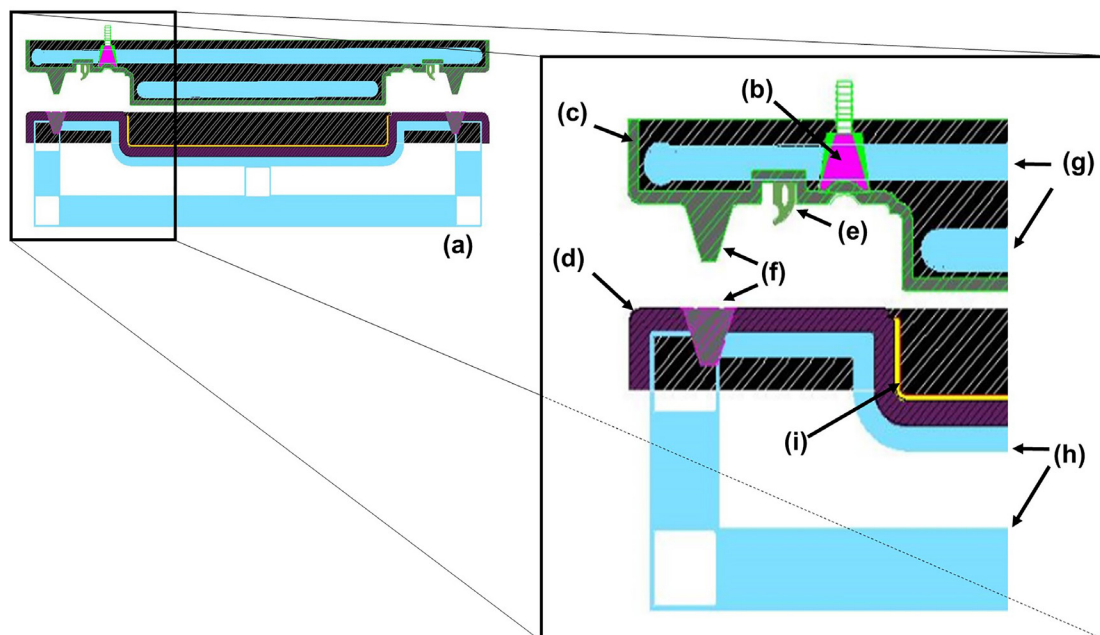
(a) schematic cross section view of RSVAM mold dies, (b) vacuum duct, (c) upper mold die, (d) lower mold die, (e) rubber gasket, (f) alignment dowels, (g) steel structure from upper mold die, (h) steel structure from lower mold die and (i) RSVAM sample.
